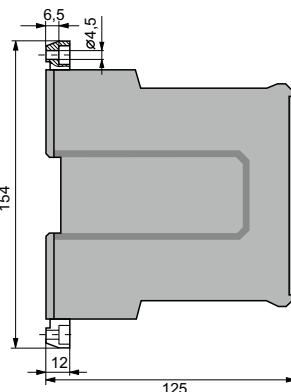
P11 in housing E16 with the screw hole brackets pulled out
